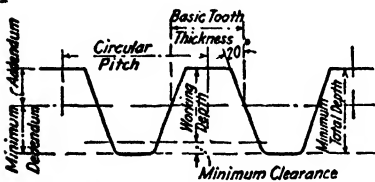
Basic rack for 20-deg. stub-tooth involute system for spur gears.
